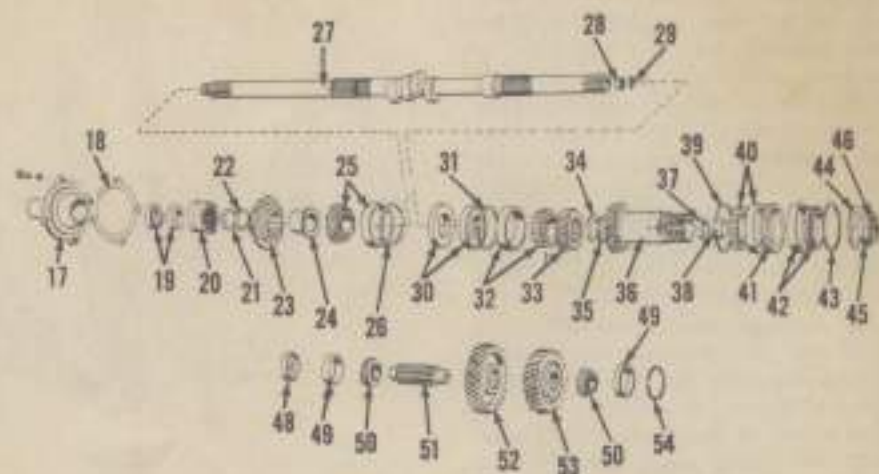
Exploded view of the clutch shaft and intermediate shaft and gears used on D-17 models prior to tractor Serial No. D17-24001.
